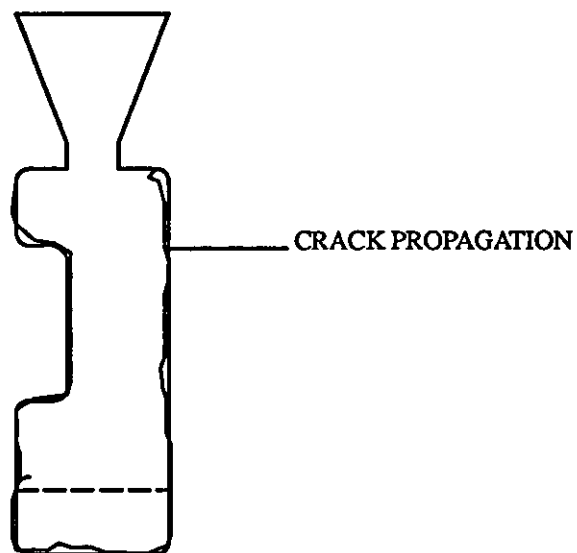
Crack propagation at the side and bottom edges of the mould
